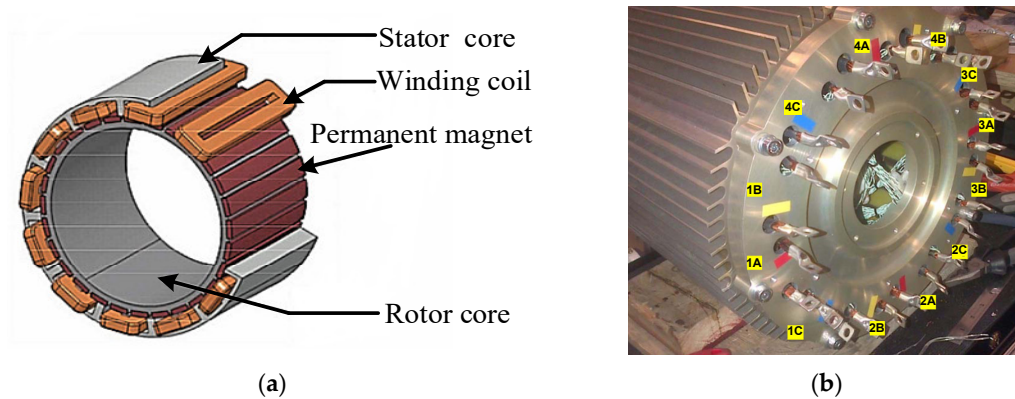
A 4 × 3-phase motor structure. (a) 3D structure; (b) winding extension.
